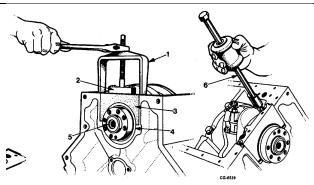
Pulling Rear Main Bearing Cap (No. 5)
